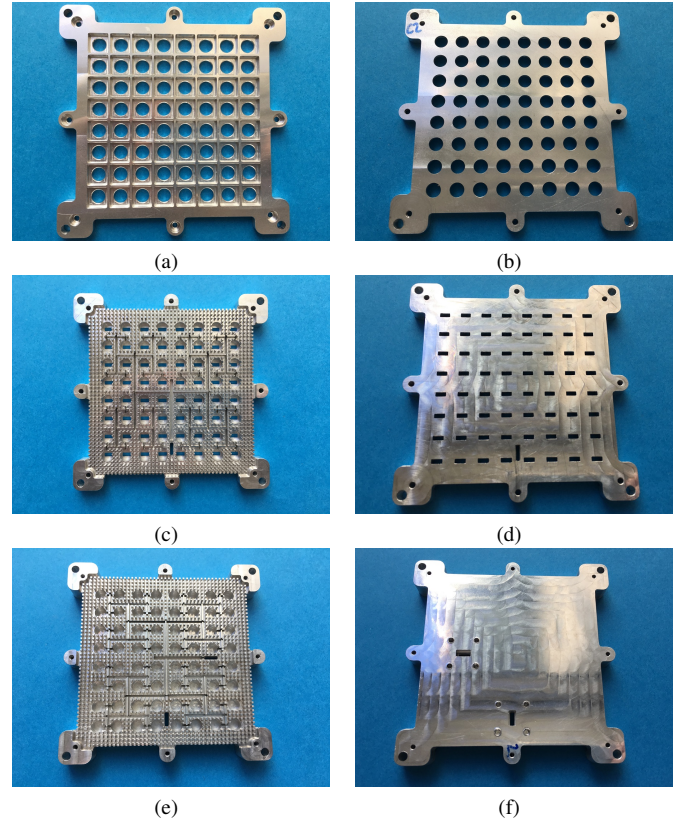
The three manufactured aluminum pieces: (a) Front view and (b) back view of the radiating layer; (c) Front view and (d) back view of the V-Pol layer; (e) Front view and (f) back view of the H-Pol layer.
